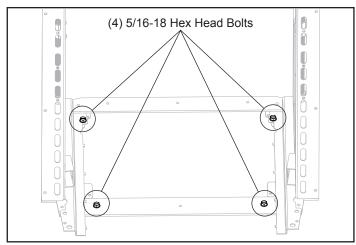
Remove (4) 5/16-18 Hex Head Bolts
